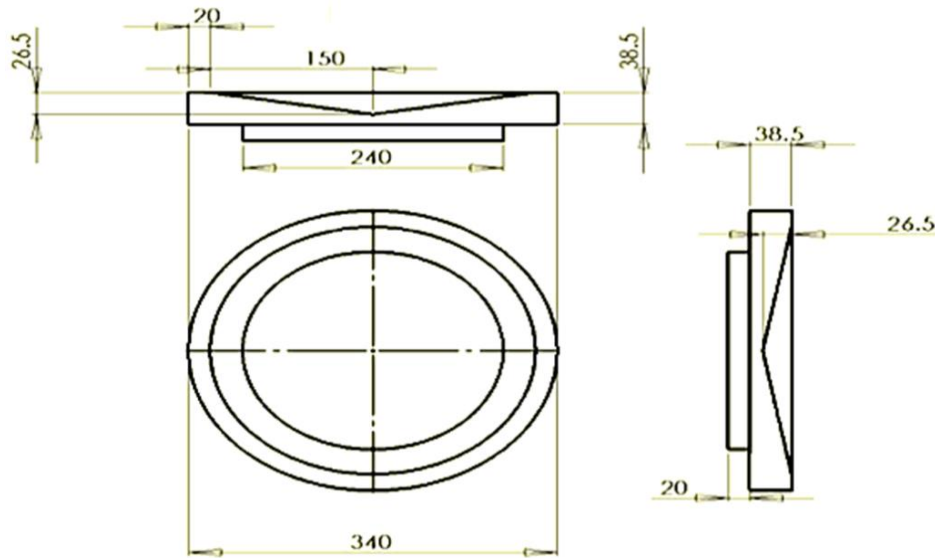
Drawing of conical-shaped indenter (10° conical)
